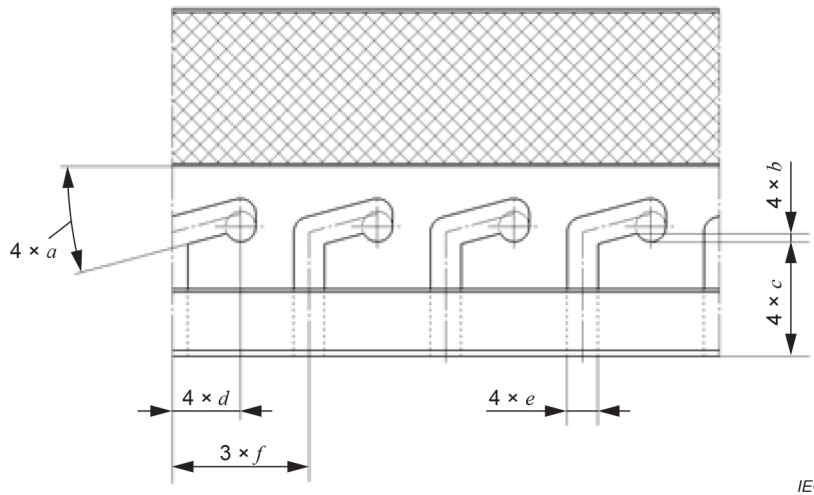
Unfolded drawing of D polarization bayonet groove of plug connector
